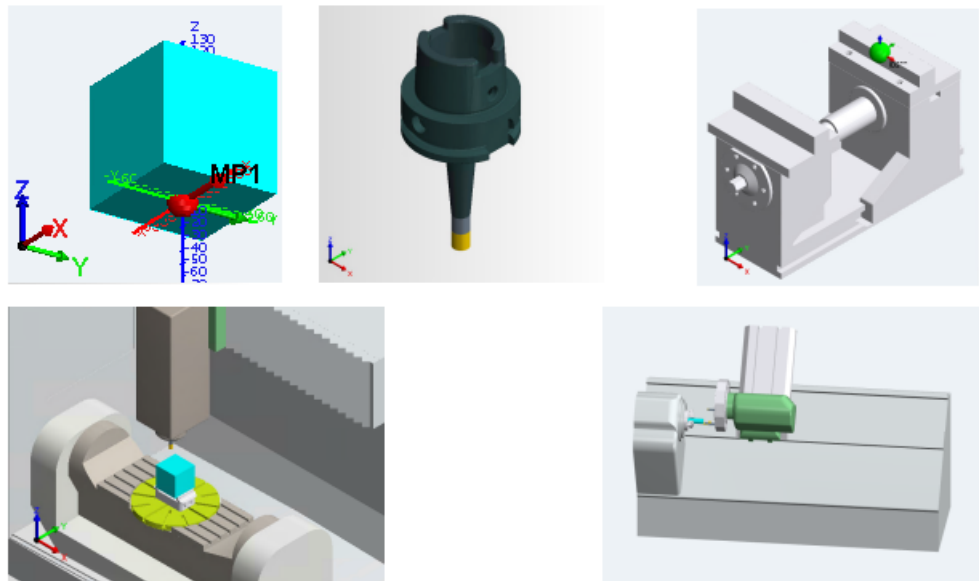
Examples of 3D images that can be zoomed, rotated and moved
